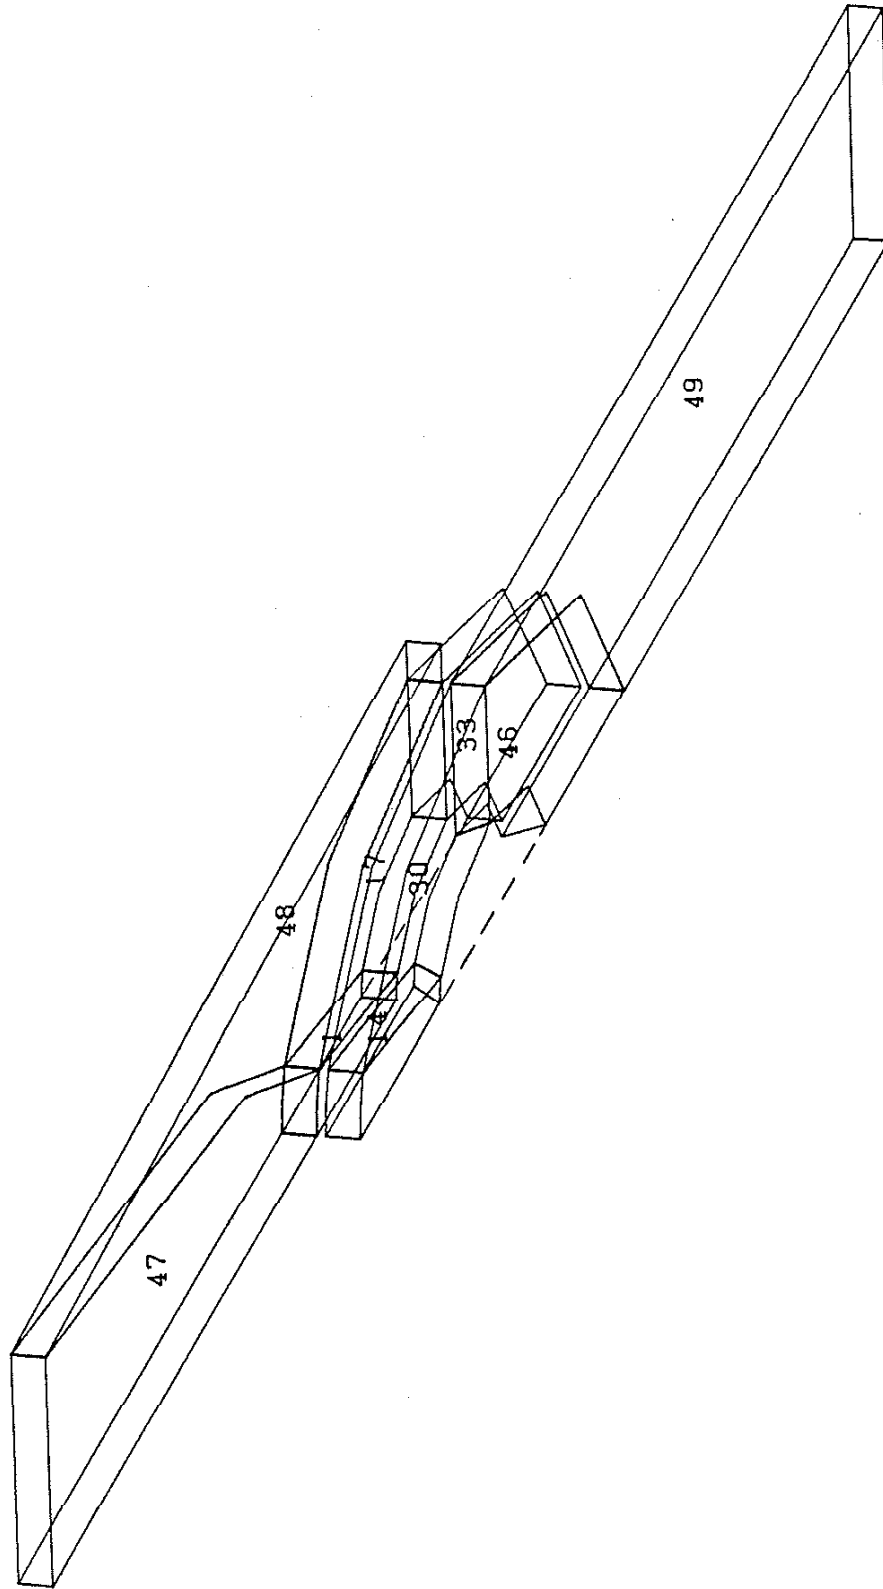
3-D Finite Element Coarse Mesh of Tensile-Shear Weld.
